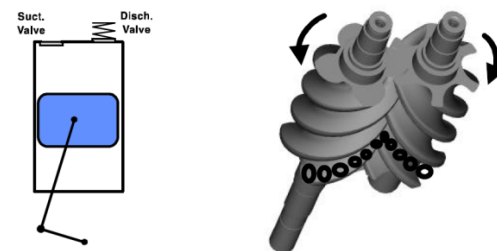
How compressors are continued fluid Compression in left reciprocating and right twin rotary screw compressor
